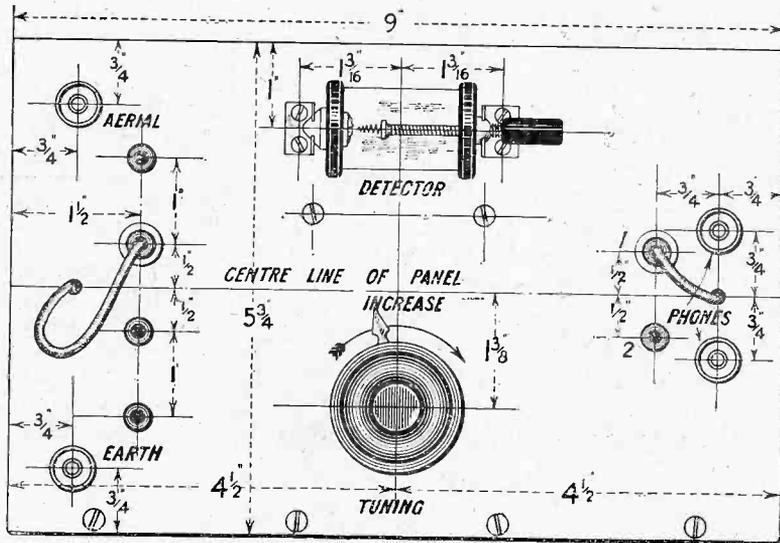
This diagram gives all the necessary dimensions for finding the positions of the holes to be drilled in the panel.
